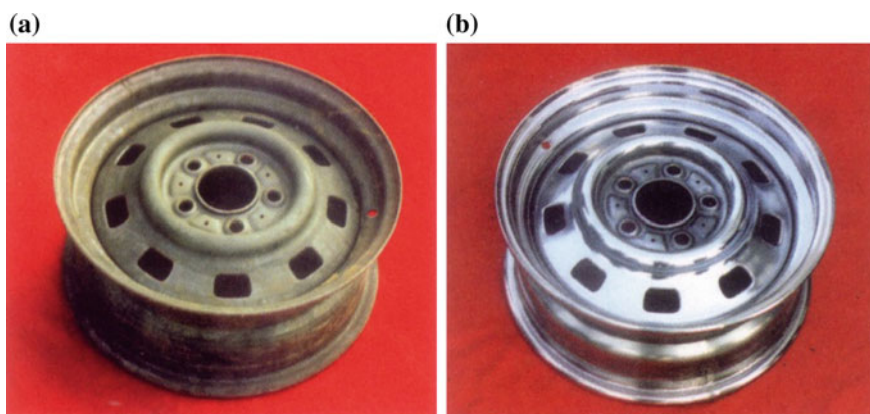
Comparison photographs of wheel hub for 130 automobile. a Before finishing; b after finishing
